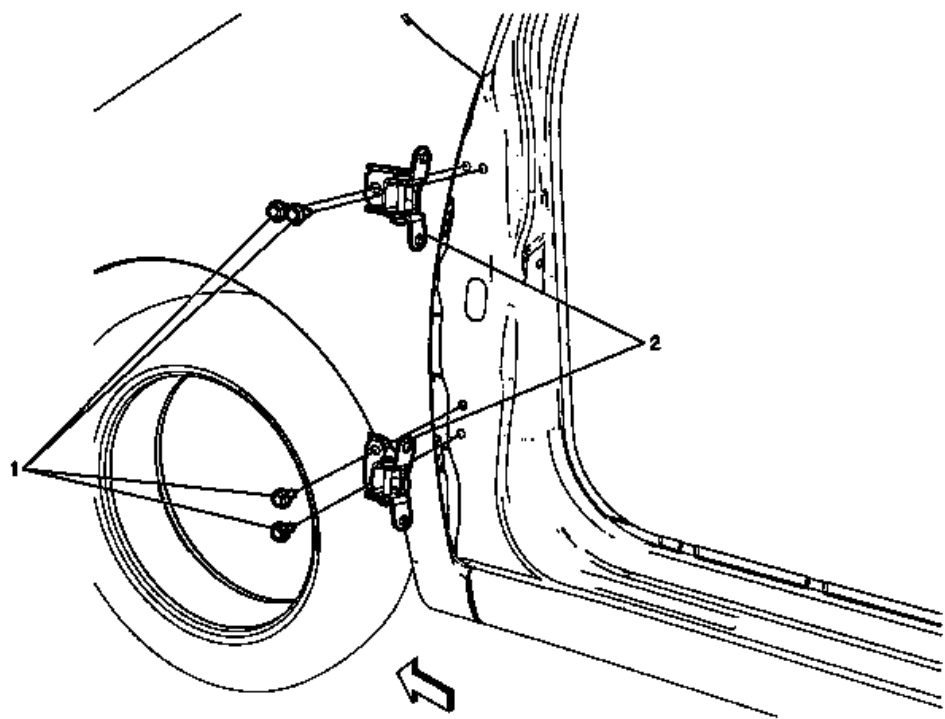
Front Side Door Upper Hinge and Lower Hinge
